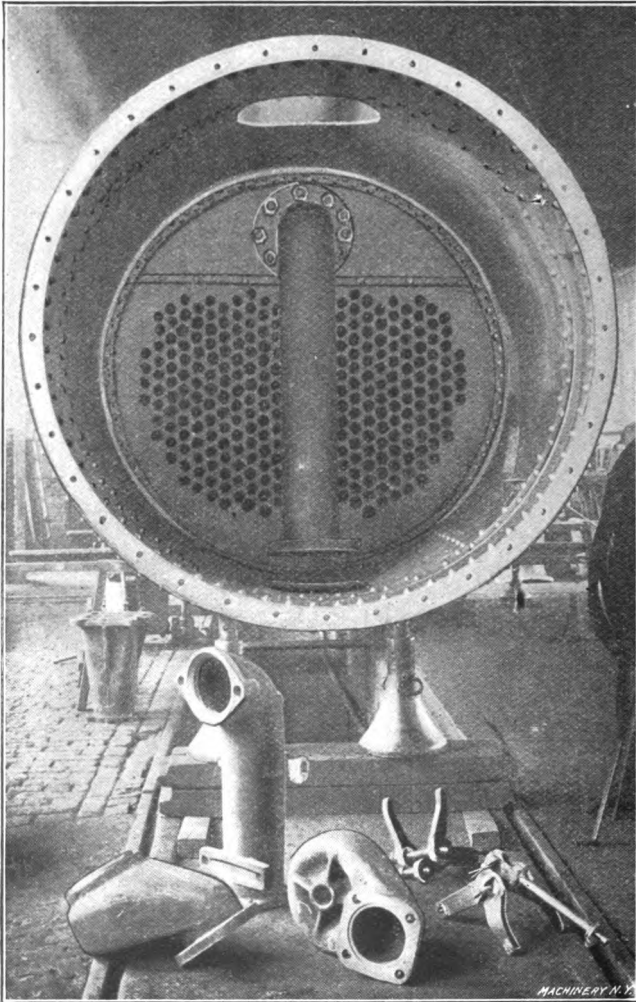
Smoke-box End with Steam Pipe in Place—Throttle, Nozzle, etc., ready for Mounting
